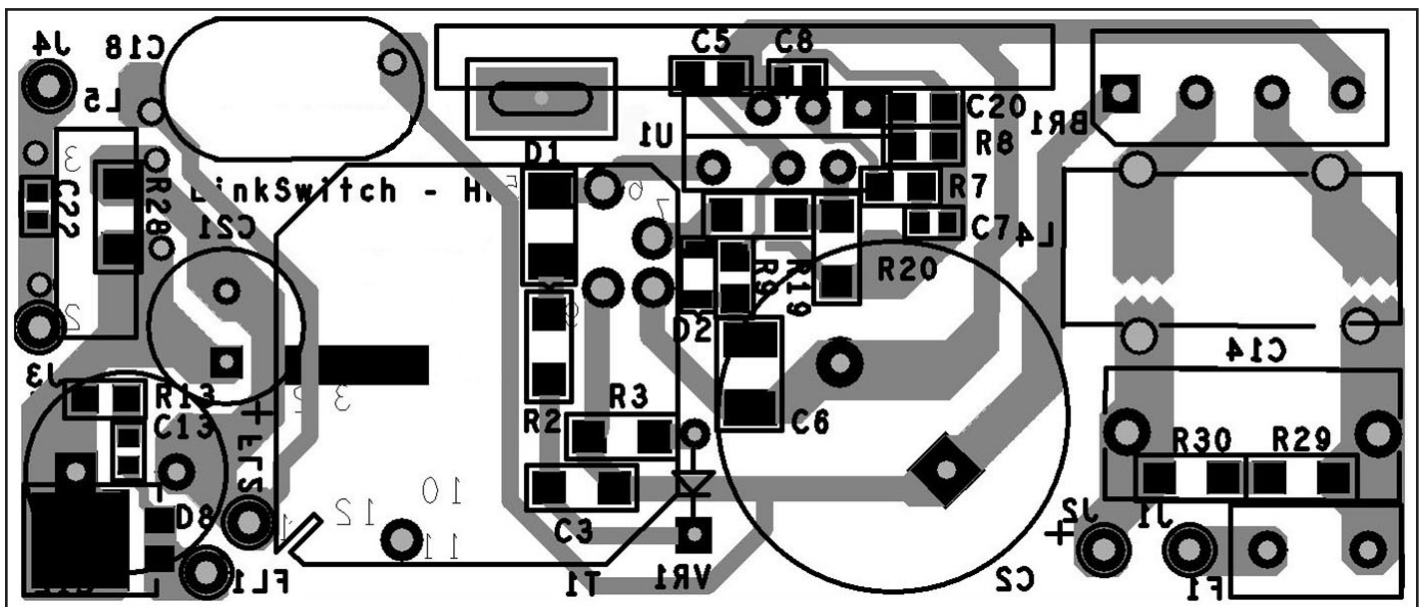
Layout for 30 W Adapter using a eSIP-7C Package (View from Bottom Copper Layer).
